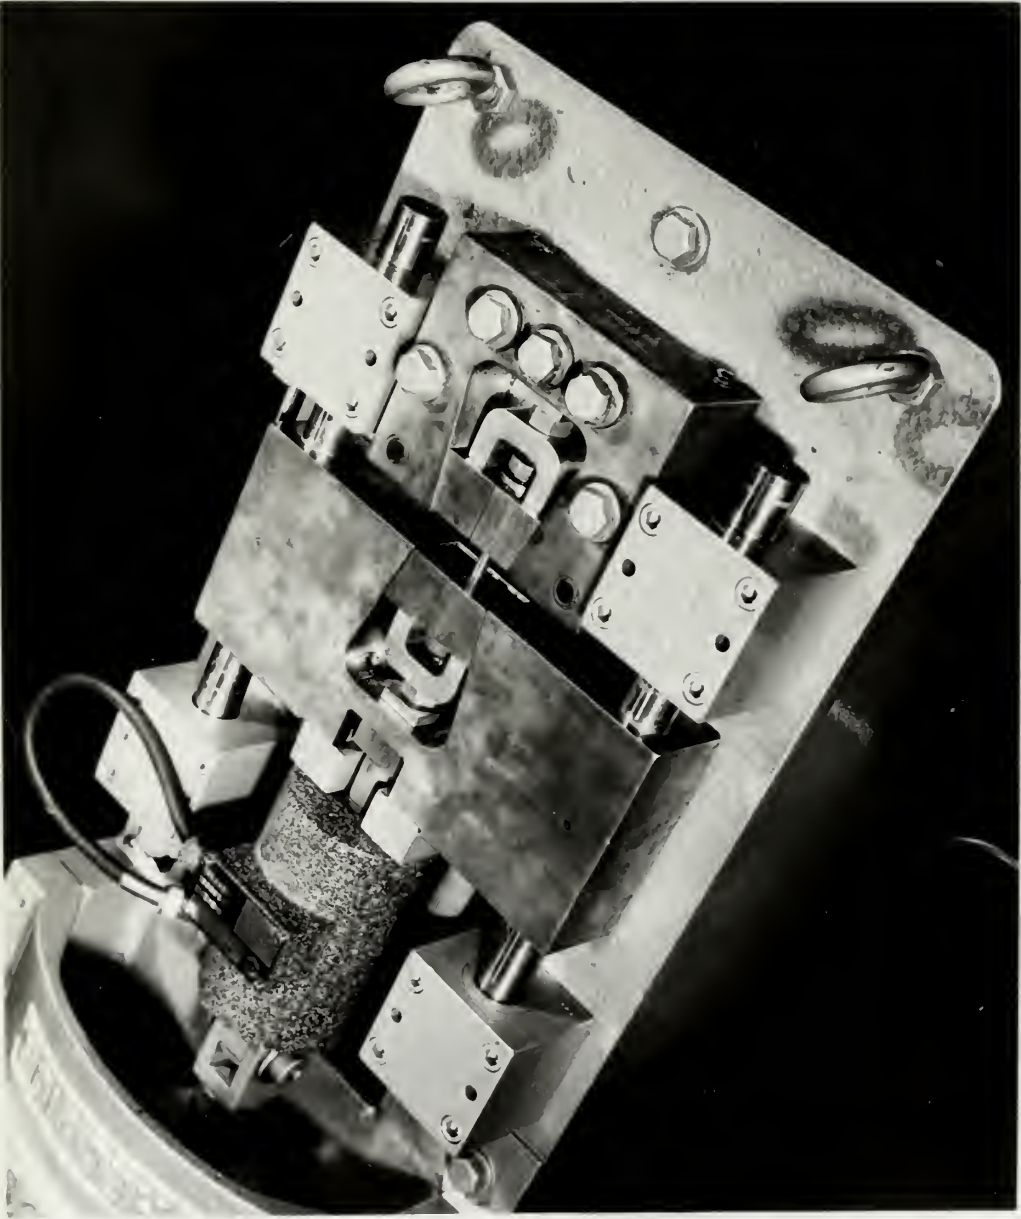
A View of a Specimen Mounted in the Jaws of the Gleeble
